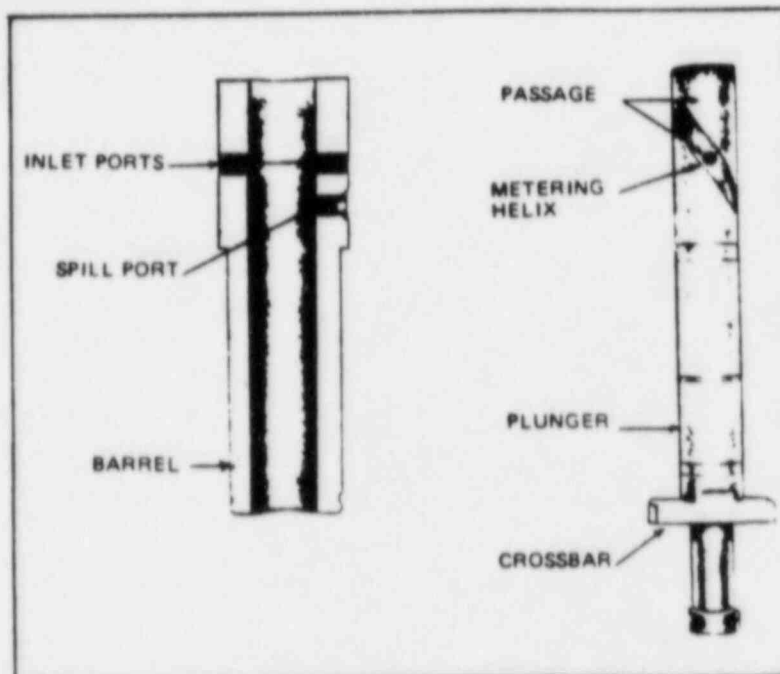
F-3 Pump Plunger and Barrel Arrangement
